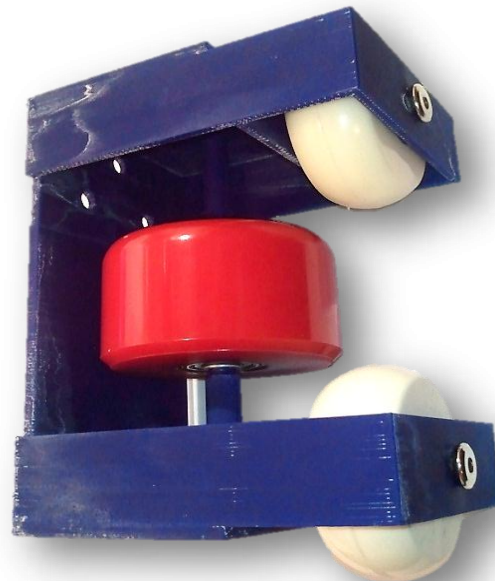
Angled view of fully assembled bracket. Bolt holes for top section are visible.
